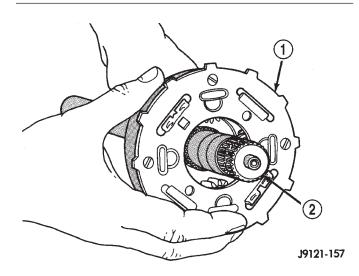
Installing Rear Annulus And Planetary On Output Shaft
